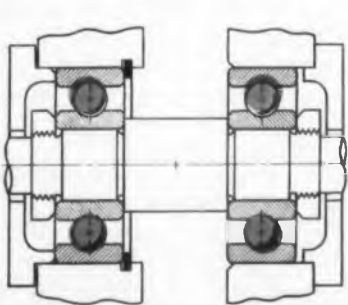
"Fixed and floating" mounting uses unflanged bearings, one with both inner and outer rings locked, the other with inner ring only locked. Use of snap wire in housing at left allows through bore for good alignment.
